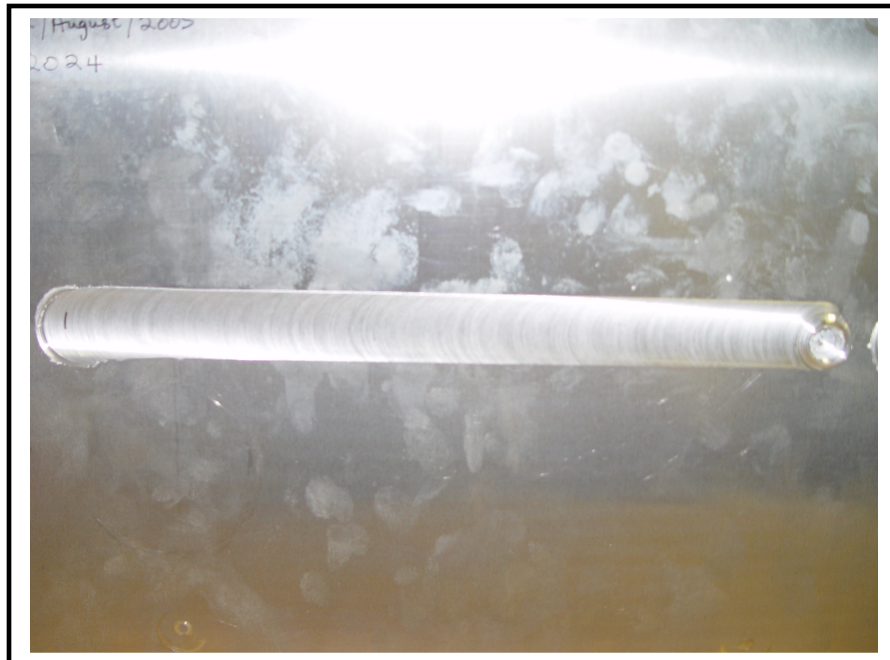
FSW-weld (2024 alloy and Tool 1).
